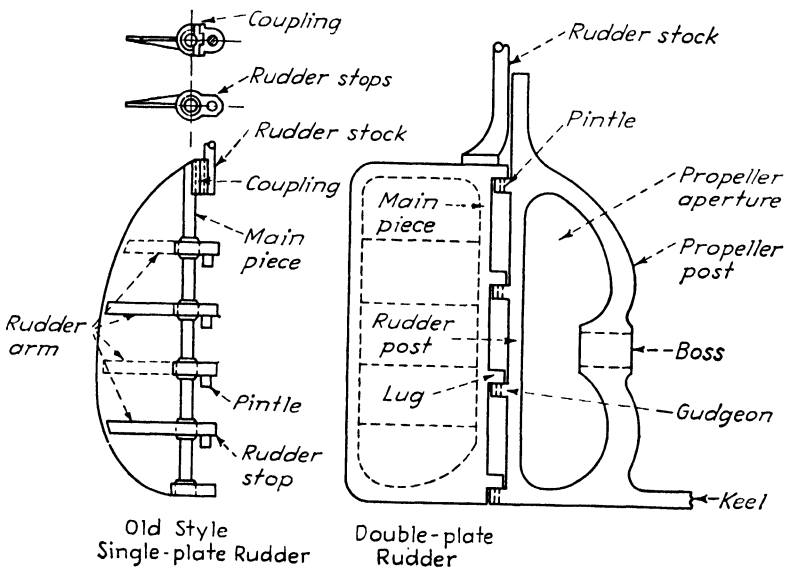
Old-style single plate and the modern hydrofoil unbalanced rudder.
